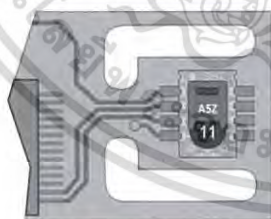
Top view of example of mounted SHT1x with slits milled into PCB to minimize heat transfer.
